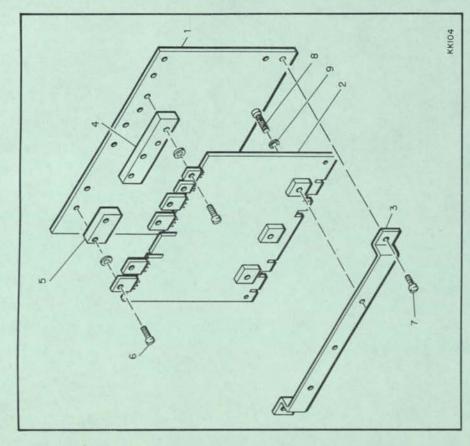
FIGURE S. VOLTAGE REGULATOR ASSEMBLY
